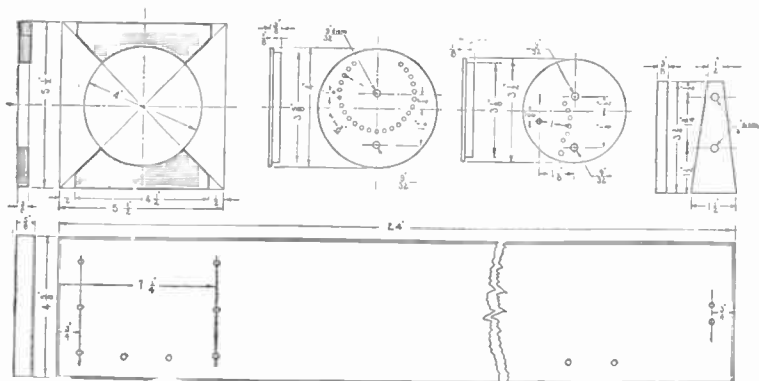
This shows an easy way to cut out the primary supports, and gives the details of the other parts
